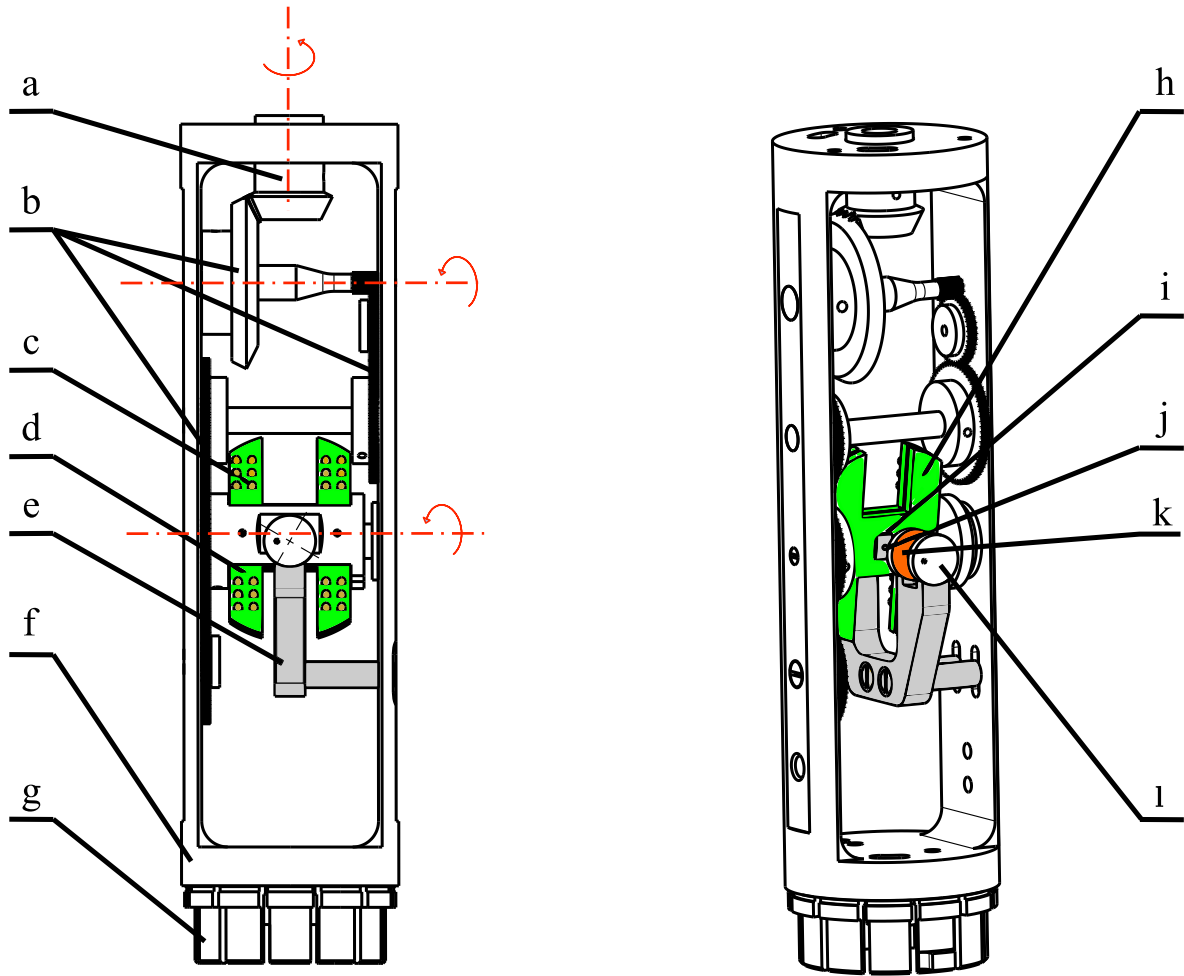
Side view and isometric view of the bottom magnetometer assembly placed at the bottom of the cryostat. The rotation axes are shown in red. a) Transmission axis. b) Gears bringing rotation to the sensor holder. The gear ratio is 1:14. c) Pin receptacles ensuring contact between the sensor holder and the sensor PCB. d) Sensor holder, fixed on the rotating axis. e) Shaking coils holder. f) Casing. g) Contact puck to the user bridge ports at the bottom of the cryostat. The contacts map is detailed in Fig. A.1. h) Sensor PCB, on which the torque sensor is glued and the Wheatstone bridge electrical tracks are patterned. i) Torque sensor. j) Measured sample. k) Shaking coil copper wire windings. l) Plastic coil support.
